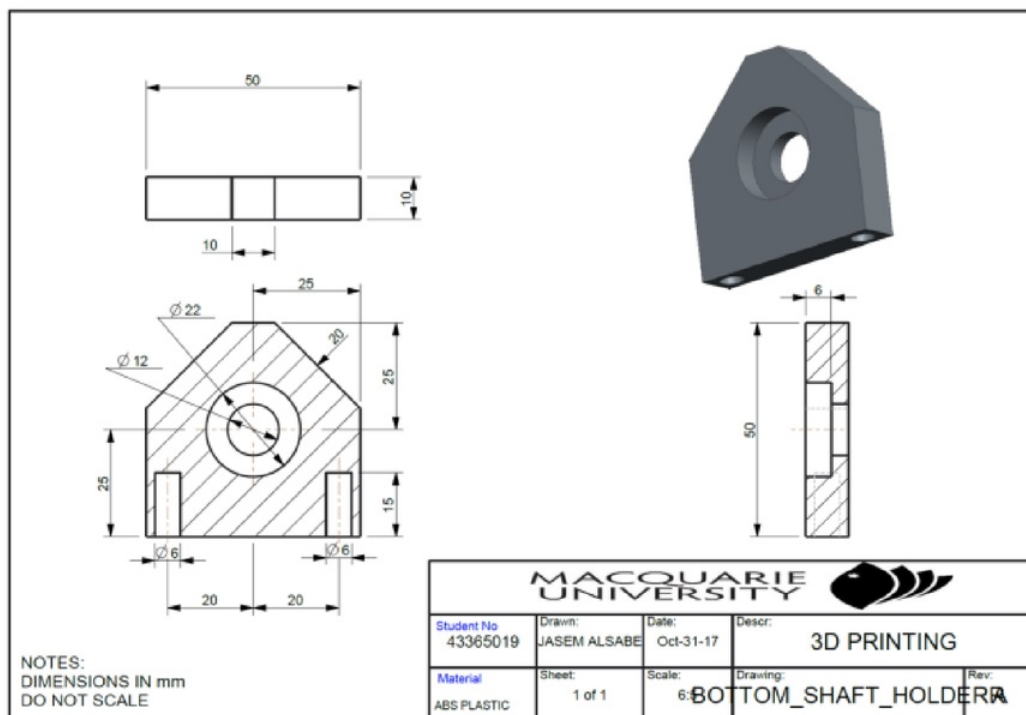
Manufacturing drawing for the bottom gear shaft holder.
